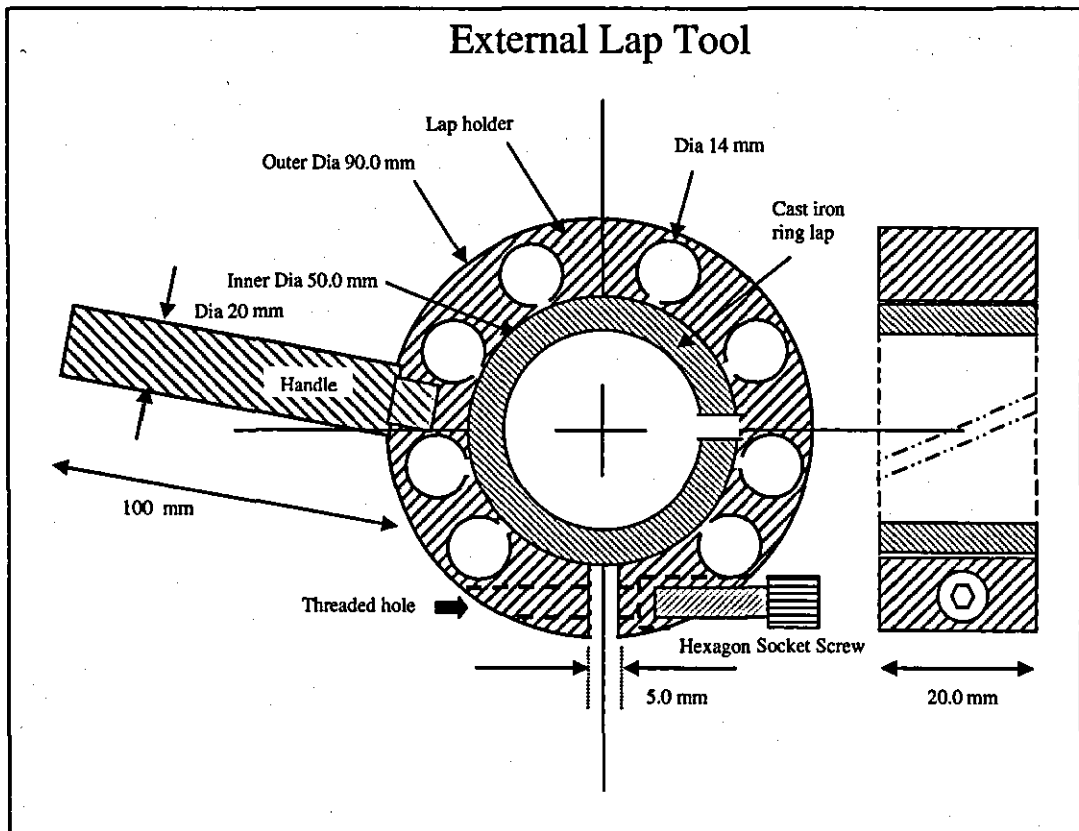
External lapping tool used in trimming and matching of a piston blank
